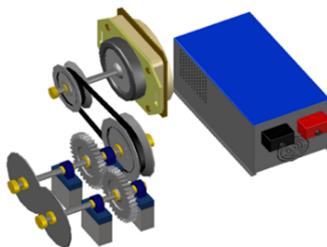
Perspective View of Power Transmission Assembly of Red Onion Stem Cutting Machine.
